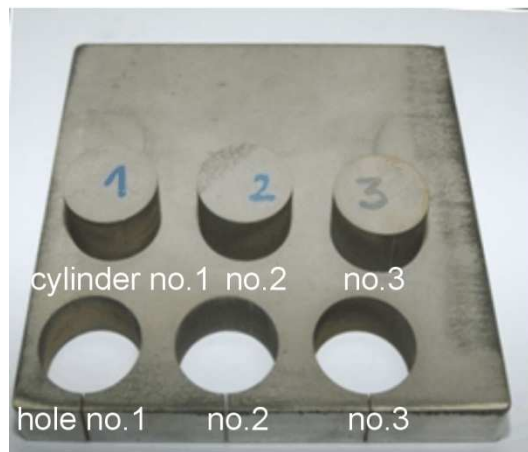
Cylinders and holes cut out by the electroerosion wire cutter
